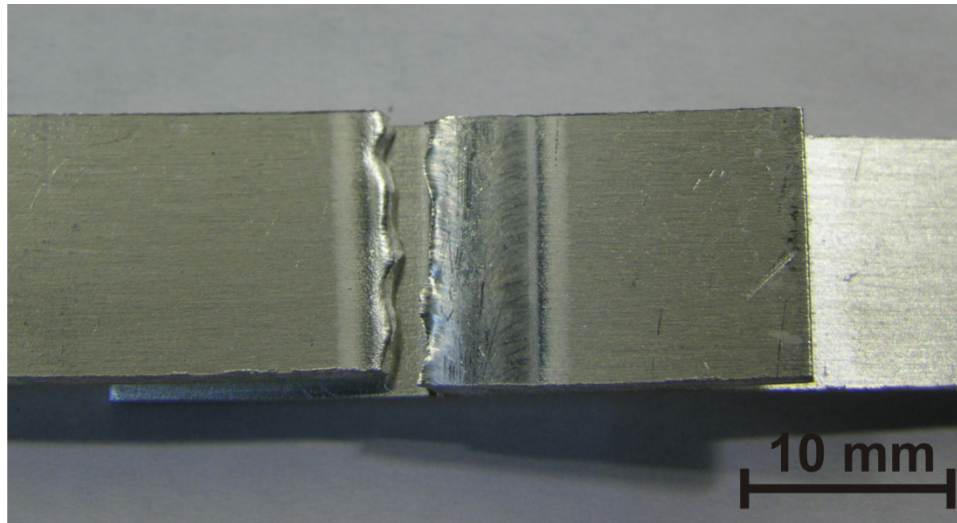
Fractured tensile specimen produced with a 2 kW welding power and a welding speed of 10 mm/s.
